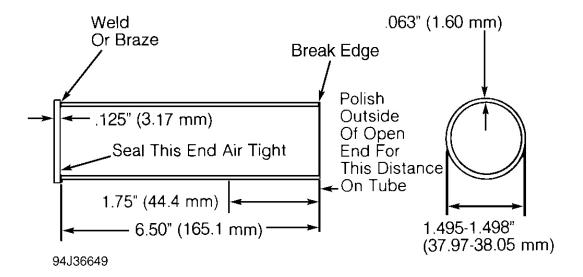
Fabricating Torque Converter Hub Seal Cup Courtesy of CHRYSLER LLC
